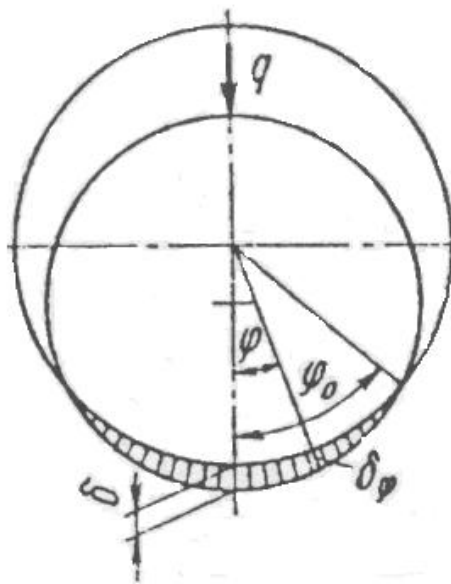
Cylindrical connection between tool and tool holder/collet
